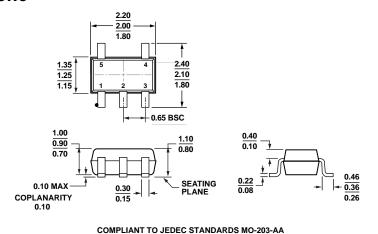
5-Lead Thin Shrink Small Outline Transistor Package (SC70) (KS-5) Dimensions shown in millimeters
